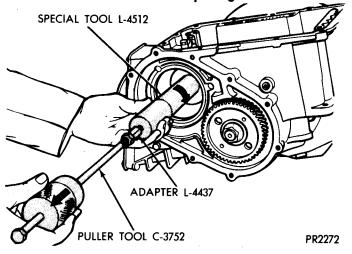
Remove Transfer Shaft and Bearing Retainer Assembly
